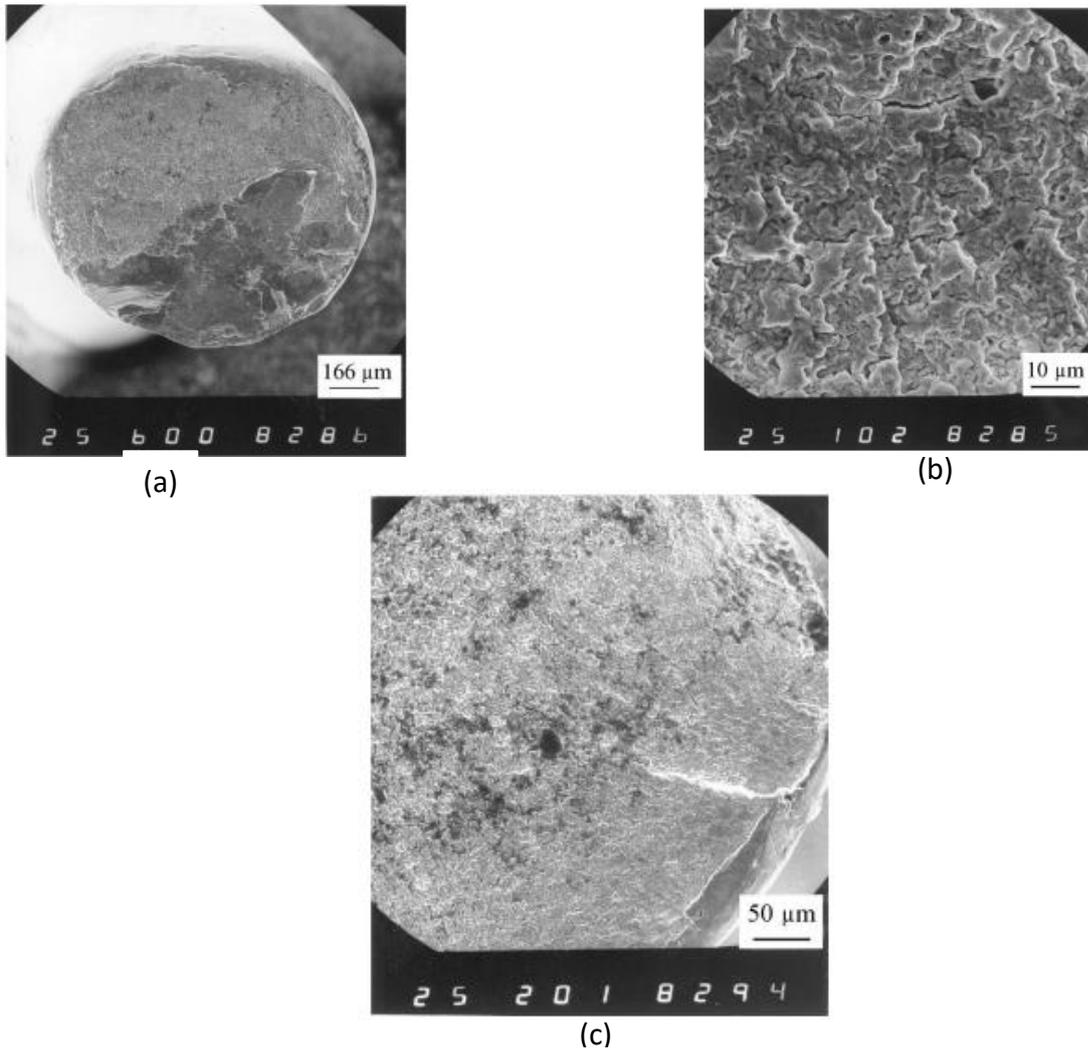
Fatigue Fracture with a) damaged edges b) micro-cracks c) Initial Crack [137]
